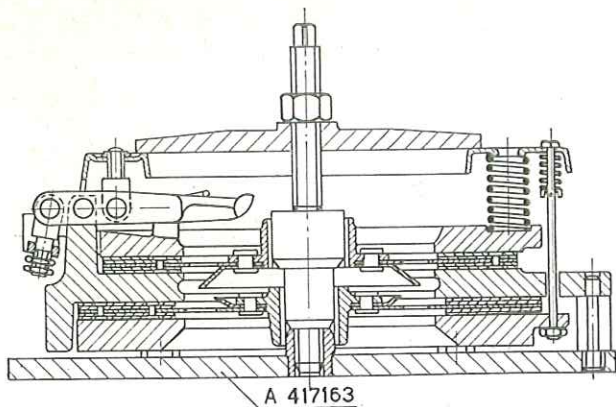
Disassembly and reassembly of the clutch on fixture A 417163.
